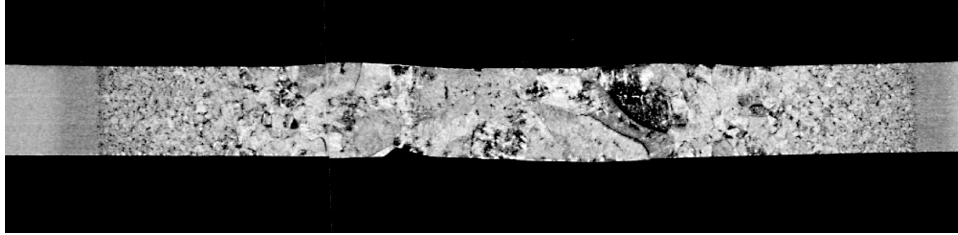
Ti–6Al–4V square groove butt weld (sample 1–4–C–7), $\times 10$.
